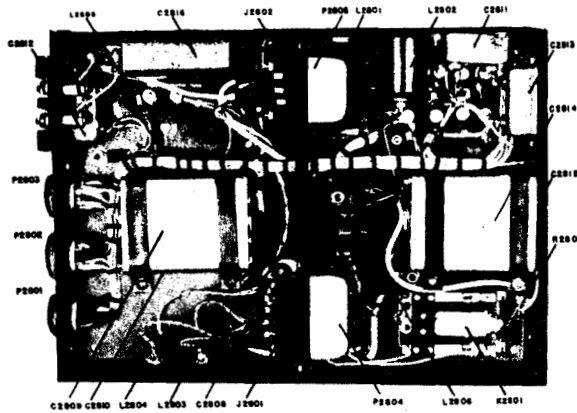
Type -211330-B Single Dynamotor Power Supply—Bottom Open View
